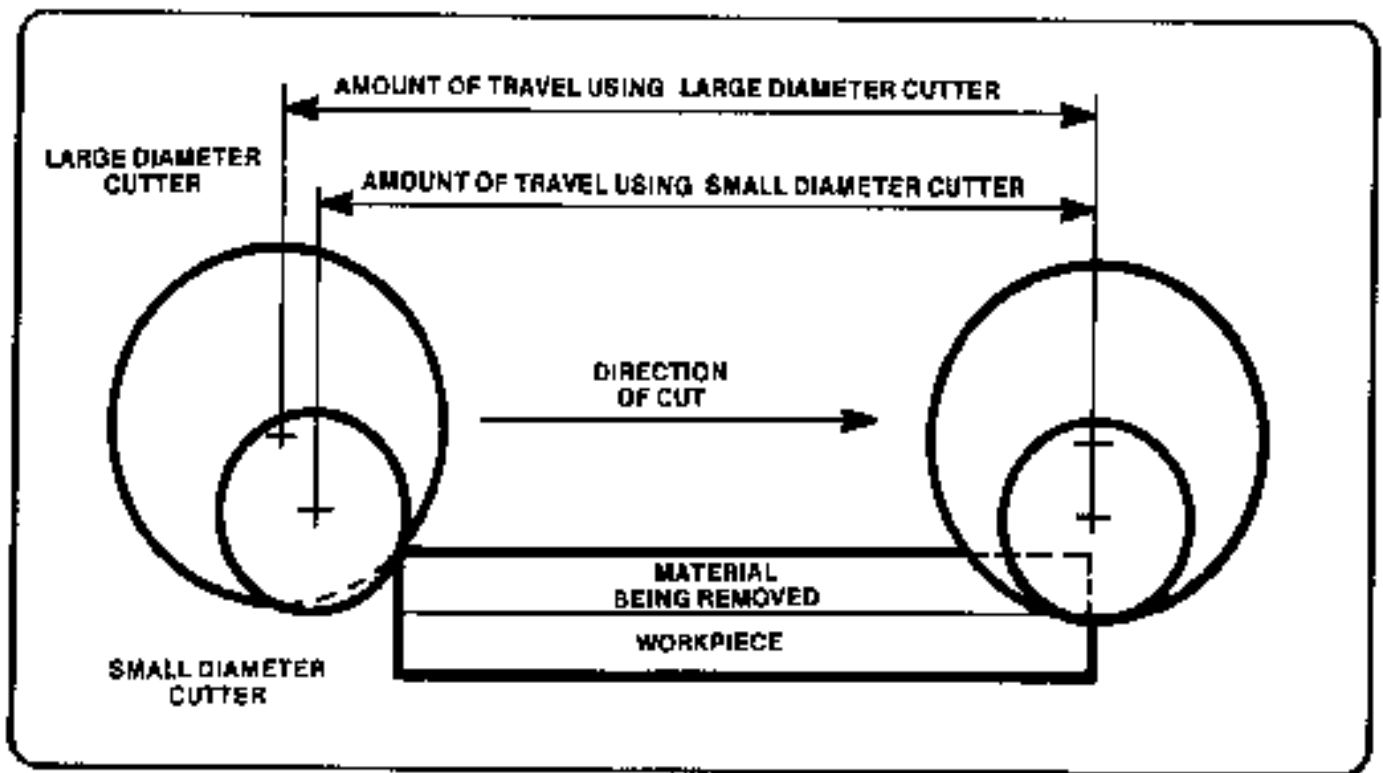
Effect of milling cutter diameter on workpiece travel.
